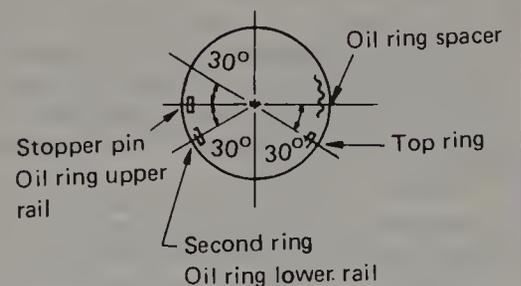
Be sure to position the piston ring gaps exactly as shown before installing the pistons (Sec 32)
